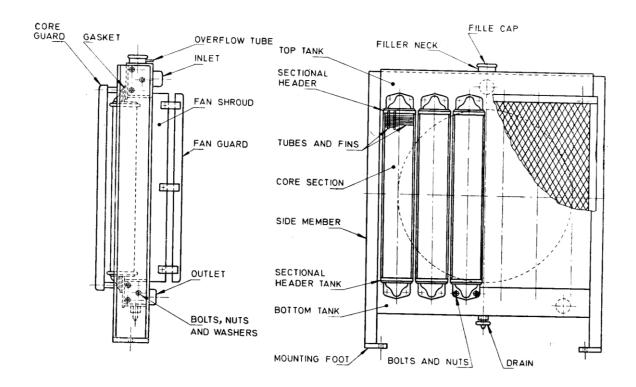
CAST OR FABRICATED RADIATOR (SECTIONAL)
